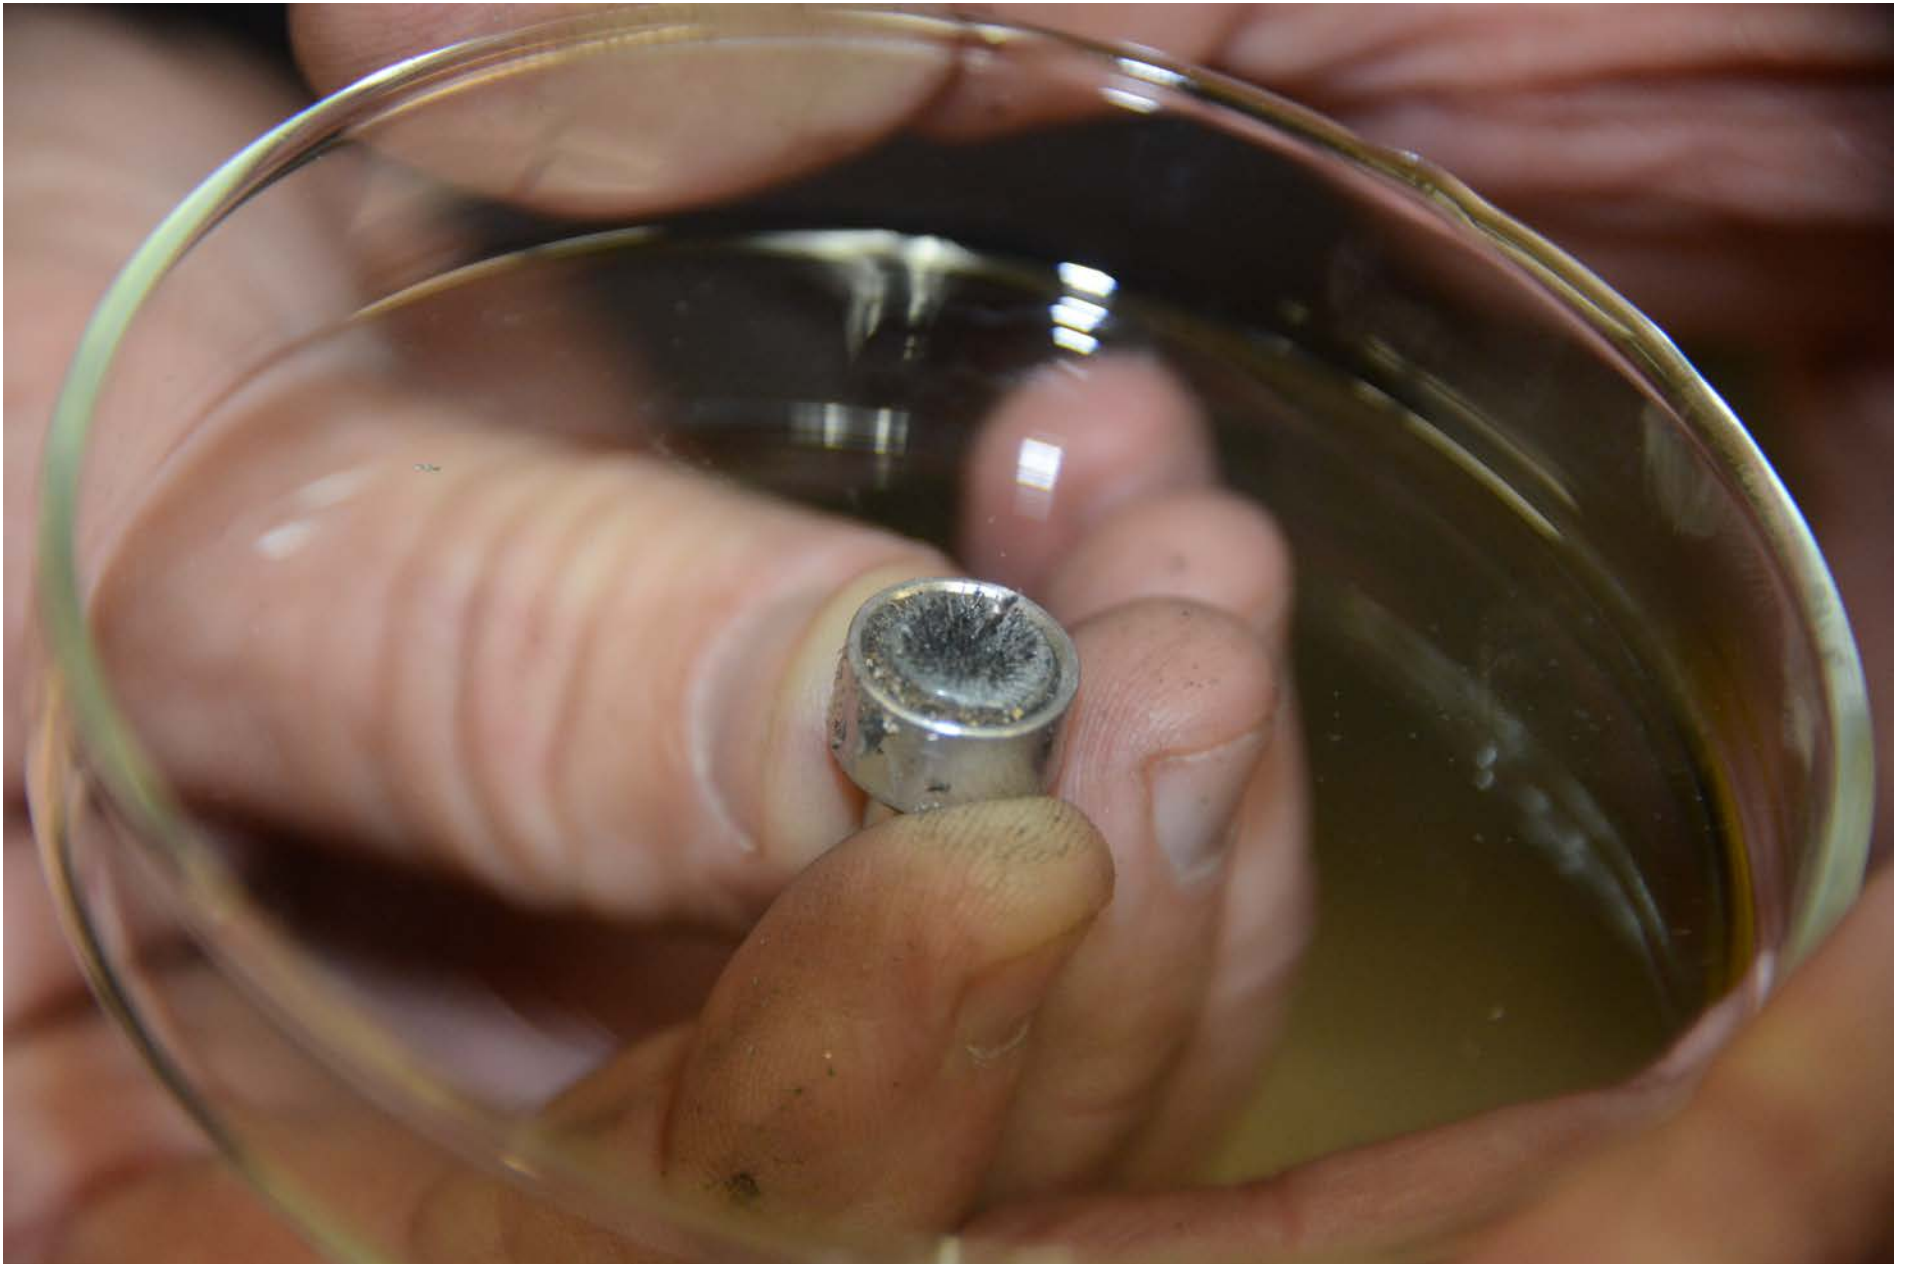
View of the removed material from the smeared section over the No. 1 connecting rod's journal. The view exhibits that a magnet attracts that material.
